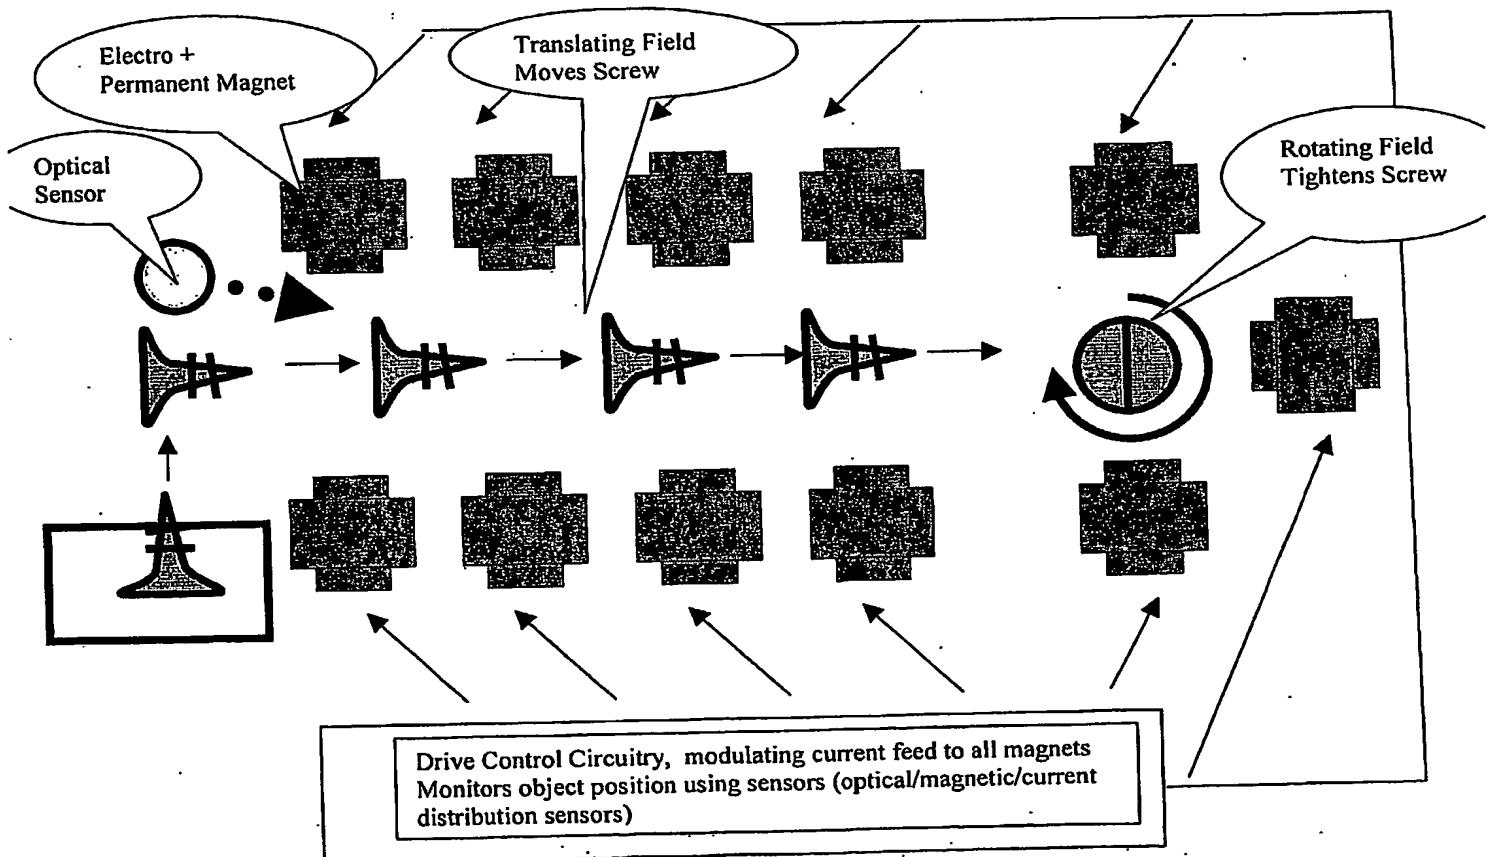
Electromagnetic Manipulator lifting exemplarily screws, and tightening them in object not shown
